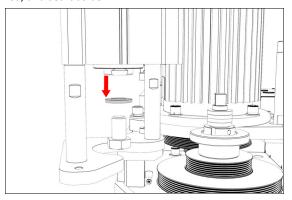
M16 washer removed from the Power Drawbar cylinder's rod.
